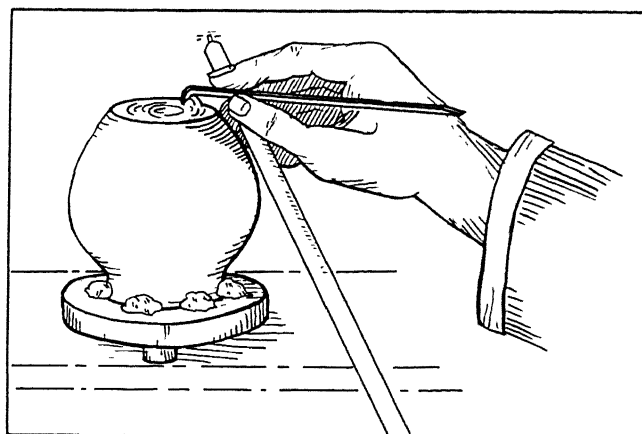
The centered piece is fastened to the wheel head with lumps of clay, and the roughing cut is turned with the round-pointed tool.
